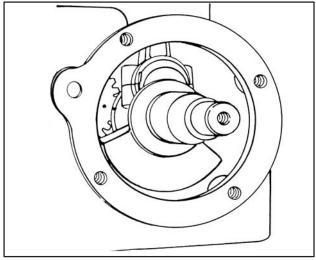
REMOVE CRANKSHAFT, A, F, H, I, L, M, N, P, S, T, U, WI, WM, 5, 6, 8
